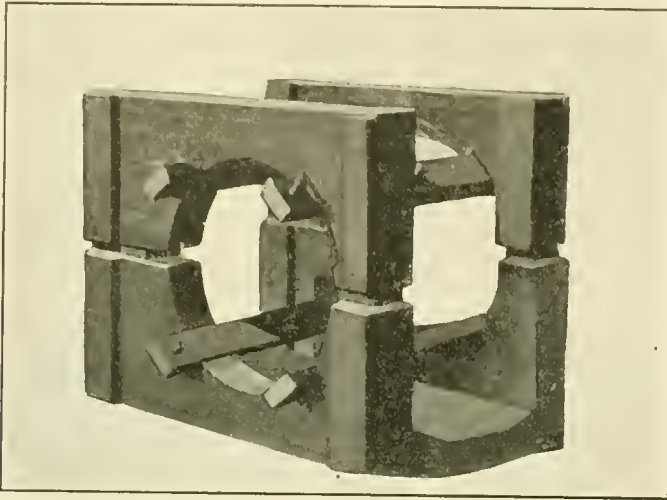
Device for Holding Cylinder Bushings in Lathe While Boring
